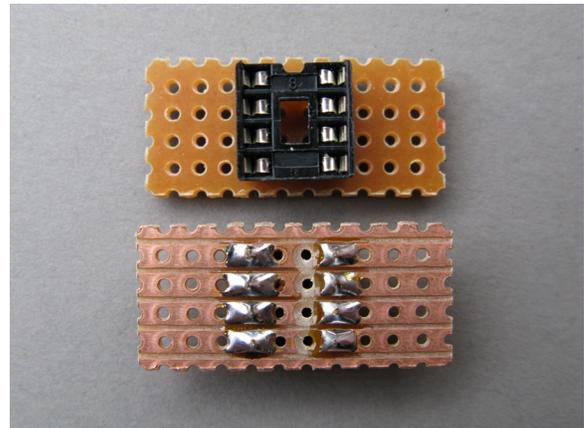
Stripboard (10 x 4 holes) and Direct-In-Line (DIL) socket and board flipped over showing breaks in strips.
